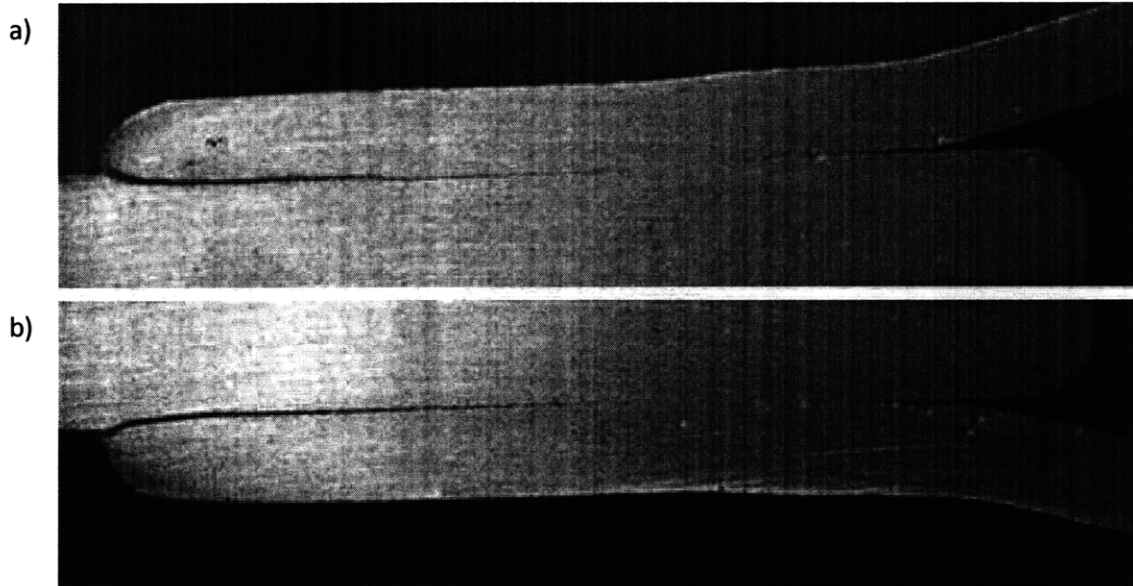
OM photograph of the cross section that was used to measure the welded length to calculate the welded length ratio of the corresponding specimen. a) Top section of the cut specimen. b) Bottom section of the cut specimen.
